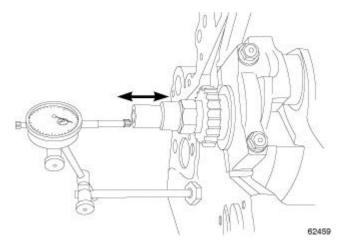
CRANKSHAFT END PLAY TYPICAL
